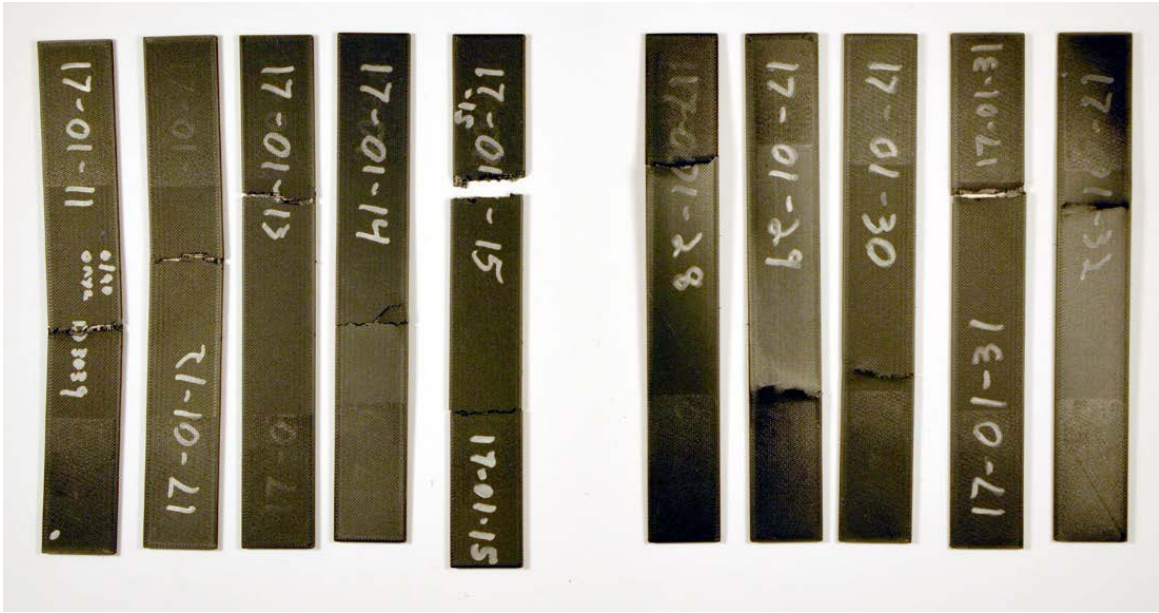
Photo of ASTM D3039 tensile failure of the Onyx/carbon fiber series. Notably, liquid water was squeezed out of two of the test specimens while in the hydraulic wedge grips when clamped and tested.
